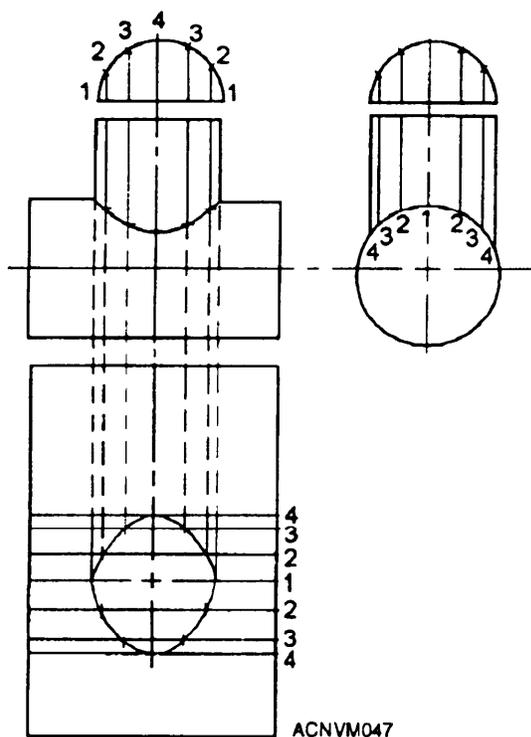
Stretchout of the main pipe in the T-joint.
